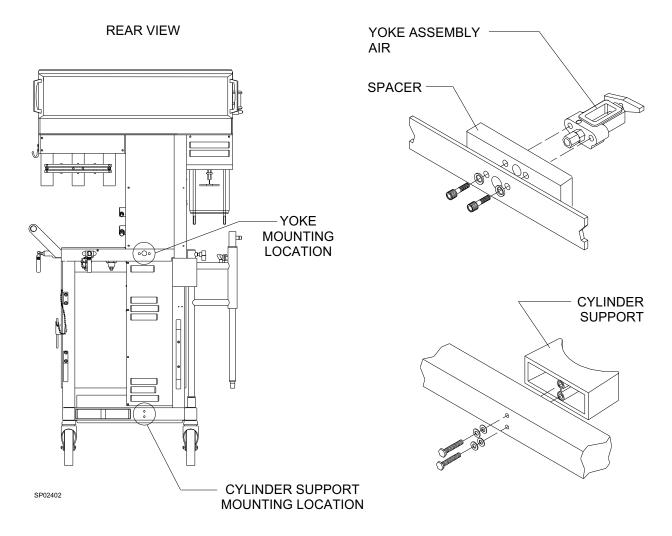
AIR YOKE AND CYLINDER SUPPORT MOUNTING LOCATIONS
